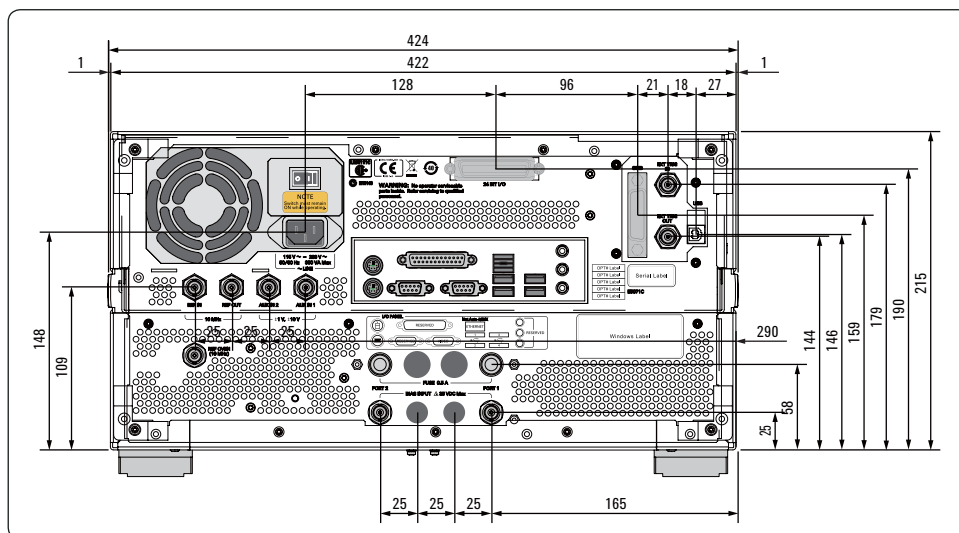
Dimensions (rear view with Option 1E5, in millimeters)
